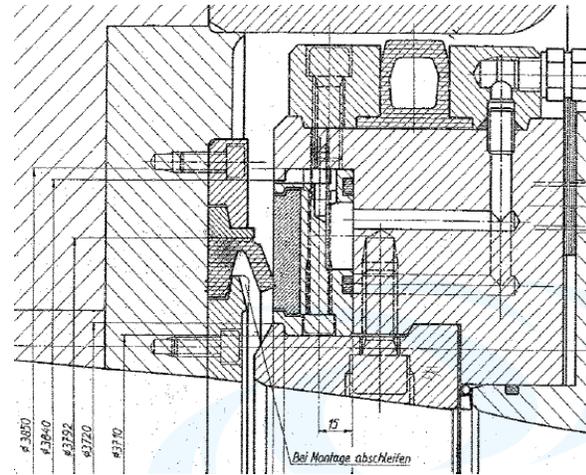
Drawing of the latest sealing system of HPP Weinzödl
